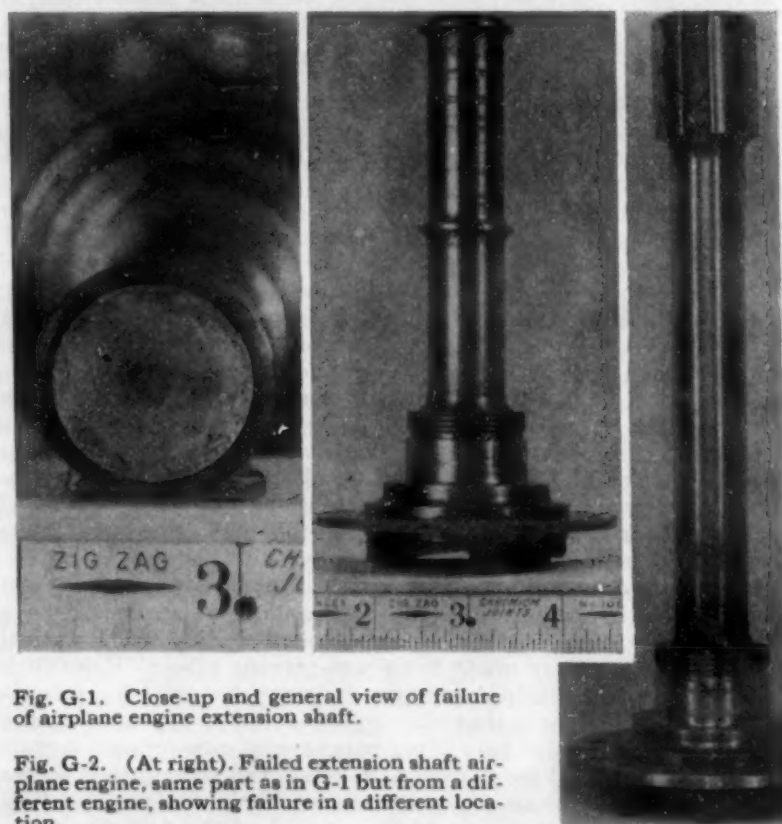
Close-up and general view of failure of airplane engine extension shaft.
